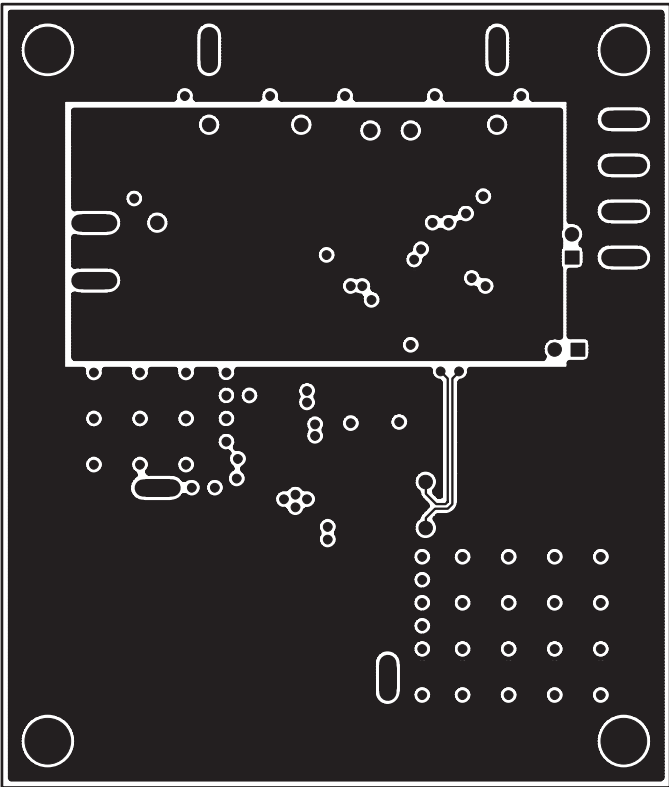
MAX17000 EV Kit PCB Layout—Internal Layer 3 (Ground Plane)
